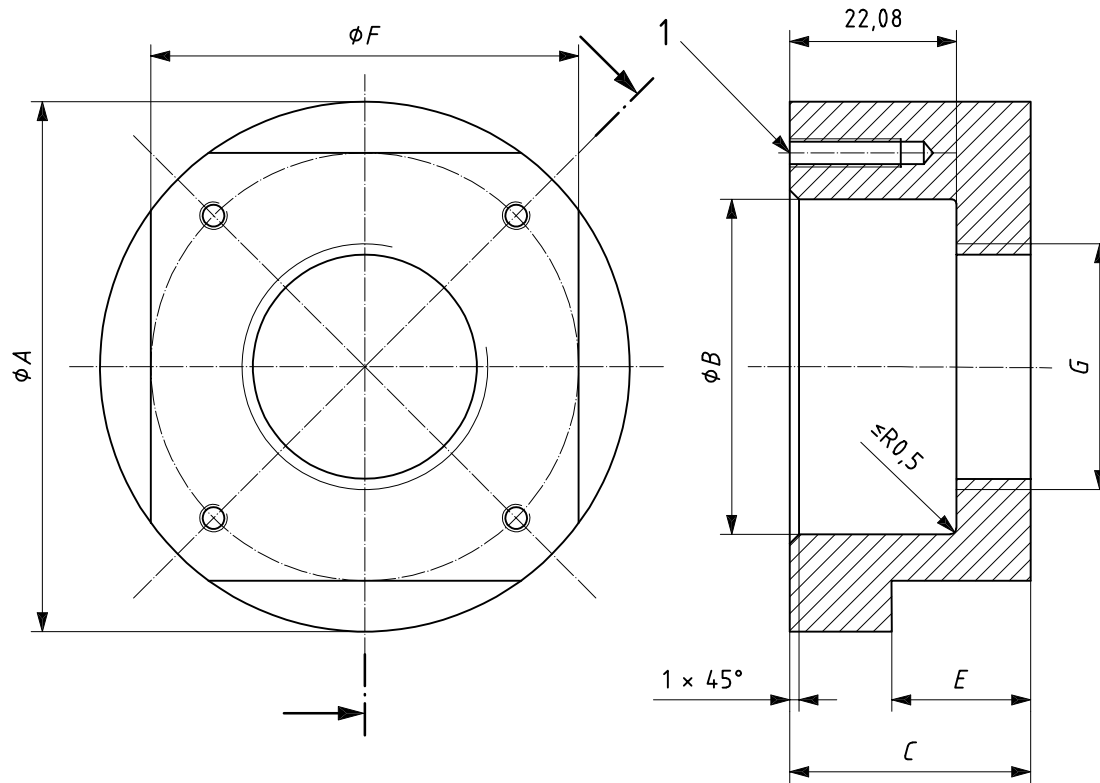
Cover of a threaded type disturbance generator with dimensions as set out in Table B.1
